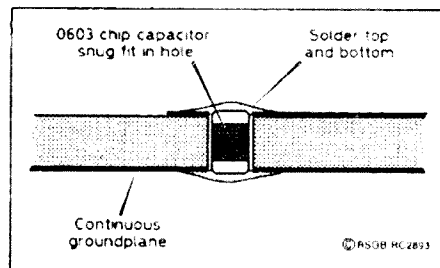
G4DGU's Technique Using an 0603 SMD Chip Capacitor mounted directly through a hole in 1.6 mm PCB.
